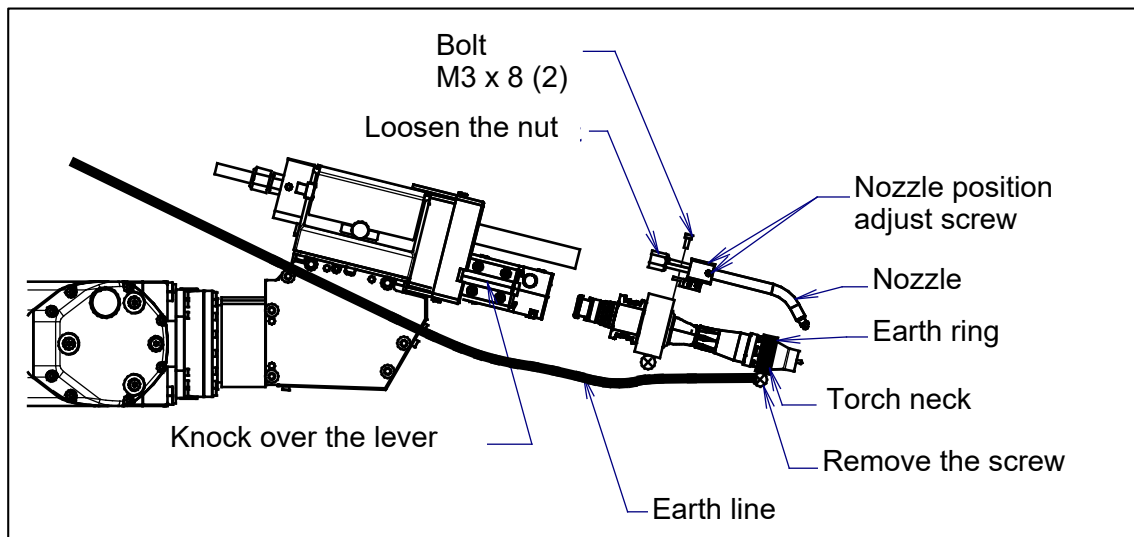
(b) Replacing the torch (Servo torch for TIG)
